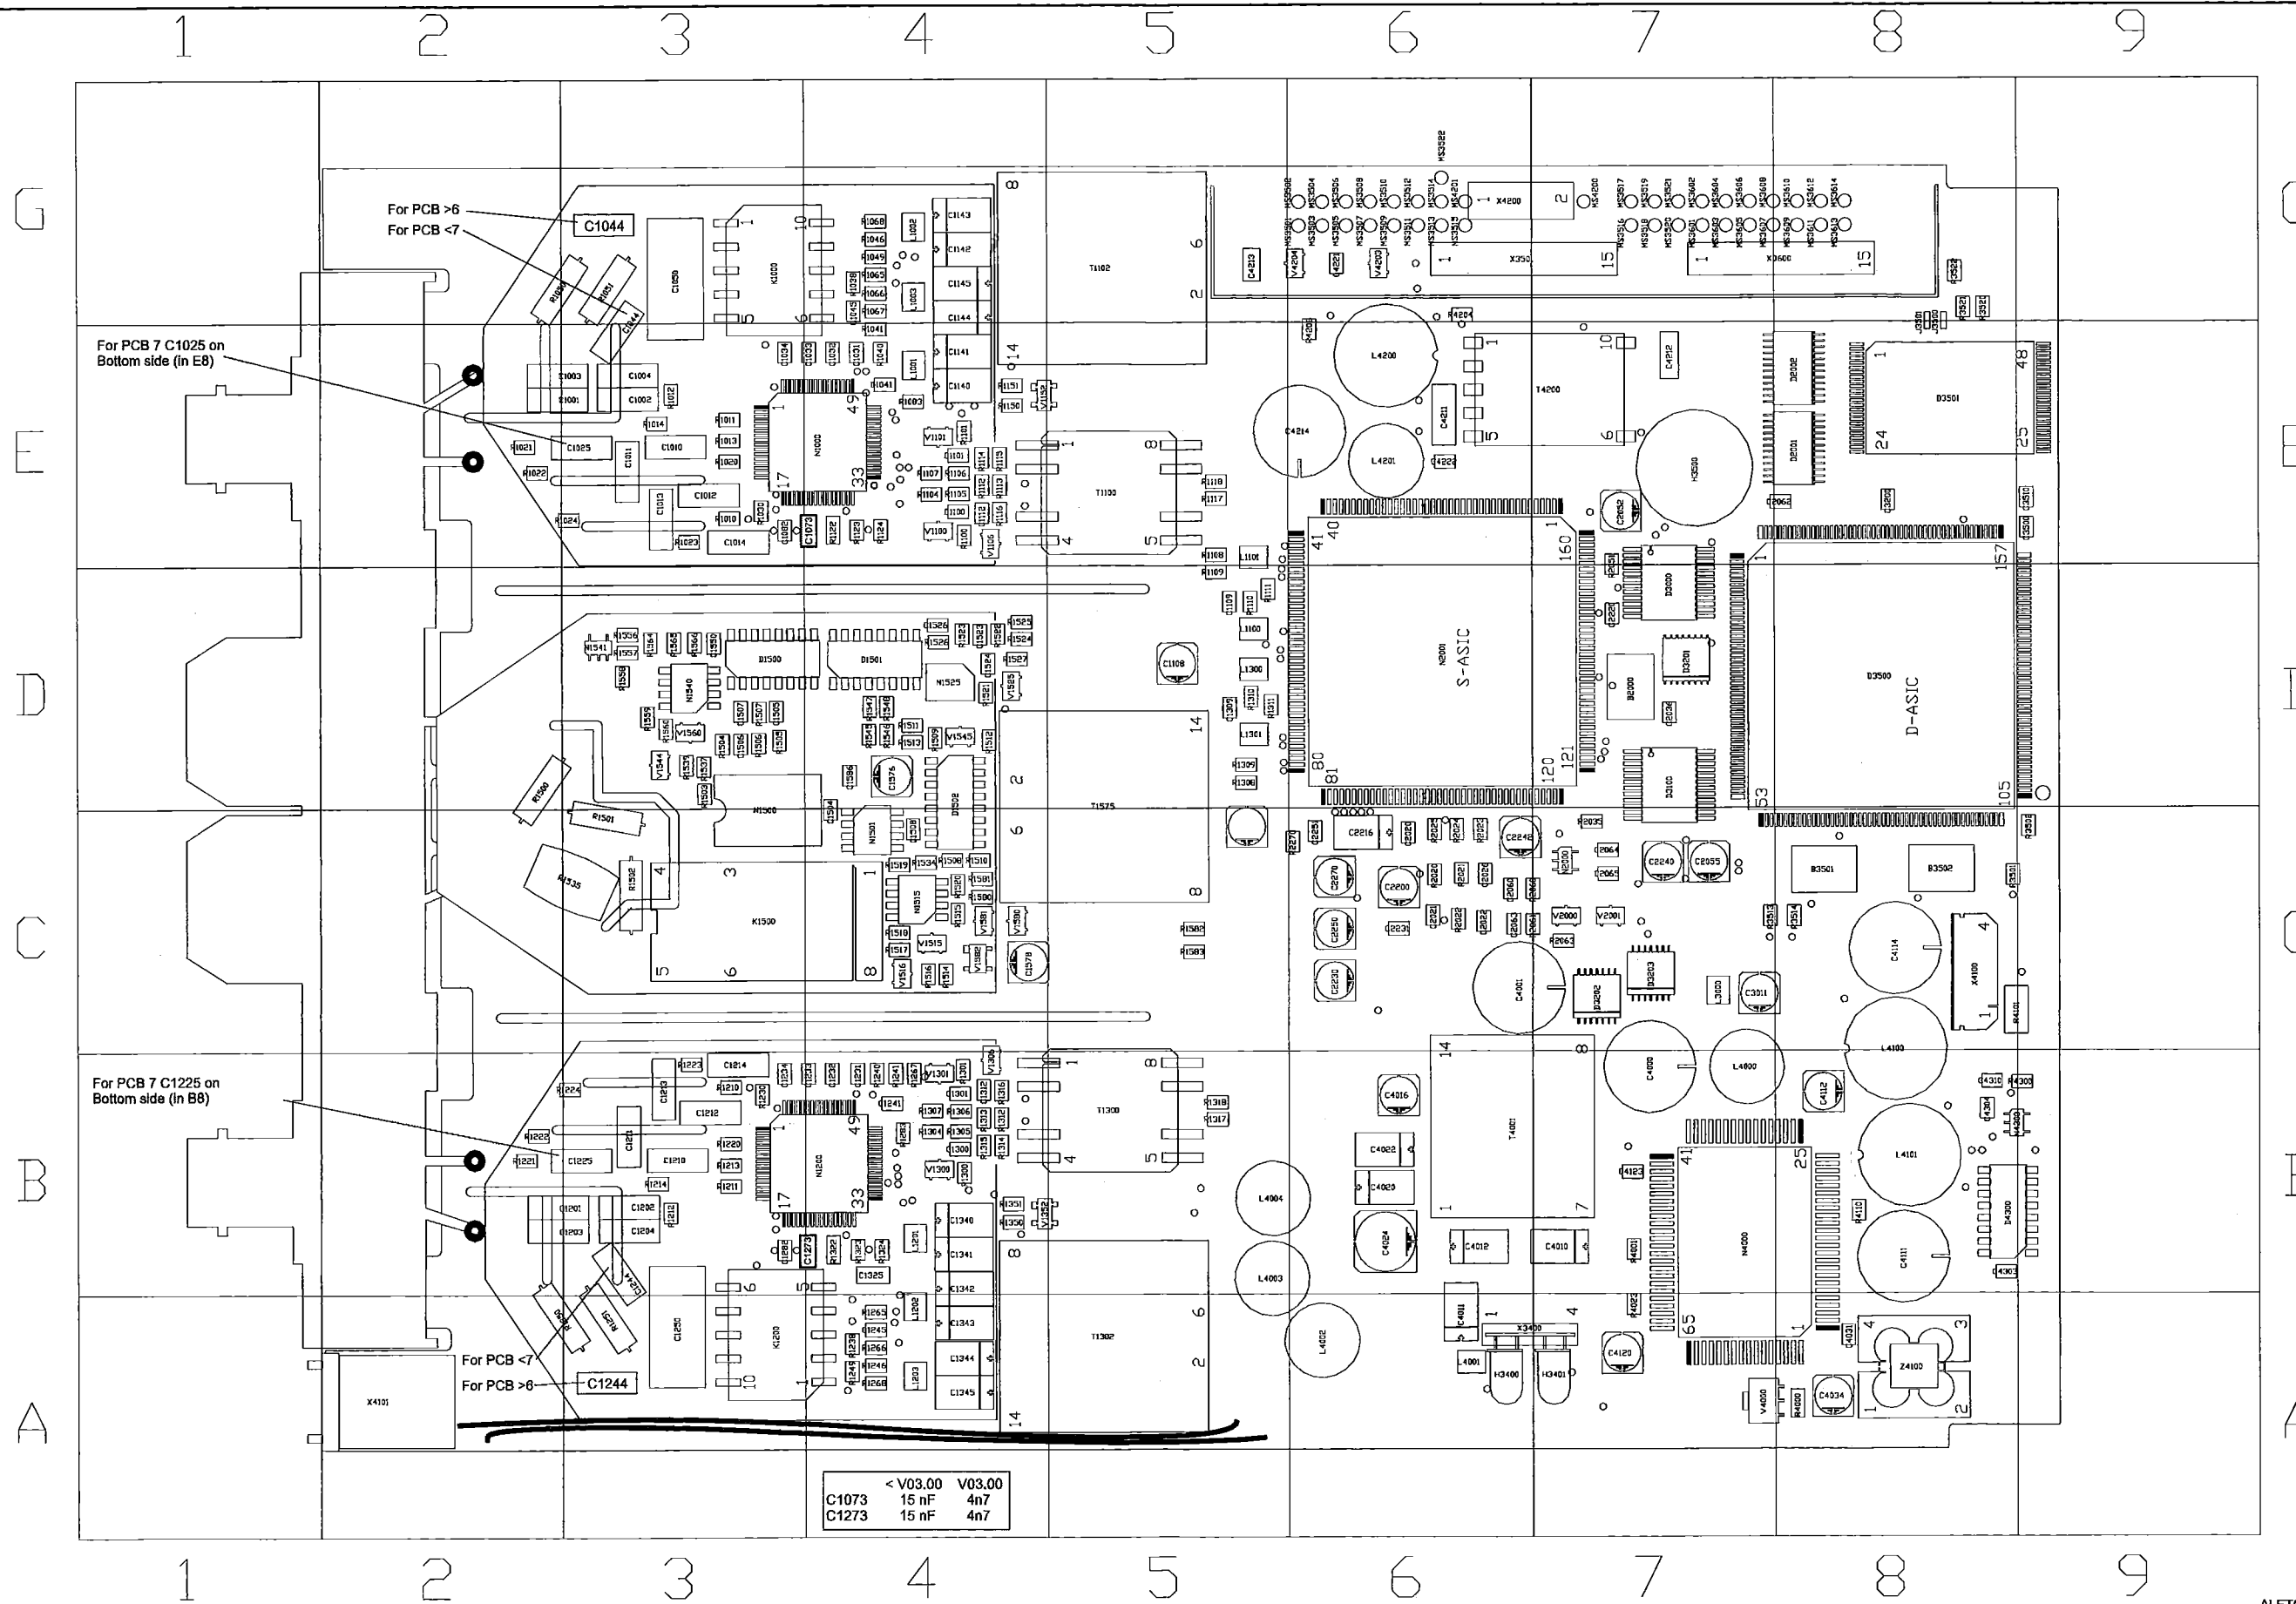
Main PCA Top View PCB Version 6 and 7
